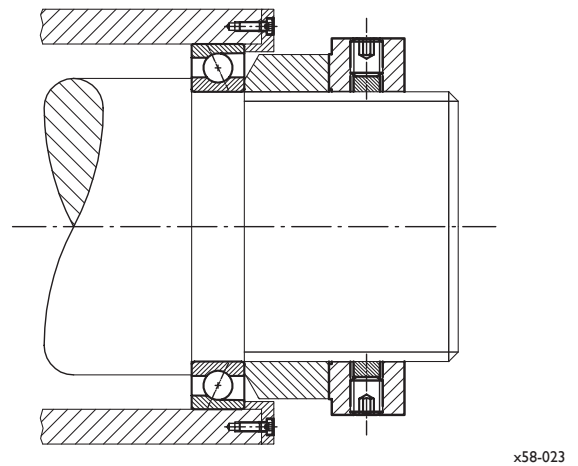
Preloading of a spindle bearing with a small cross section via a spacer sleeve due to the available installation space
